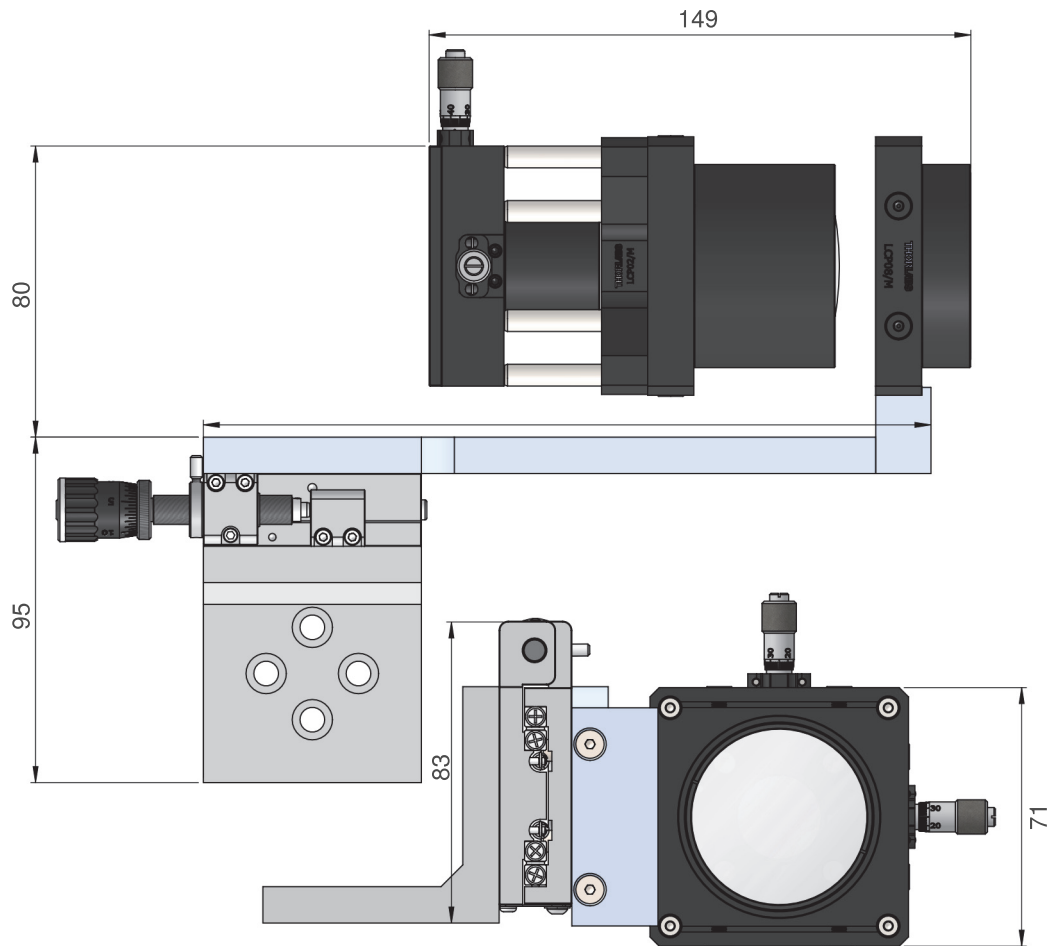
Top view and front view of the scanning objective. The dimensions are in millimeters, and were rounded to the nearest millimeters.
